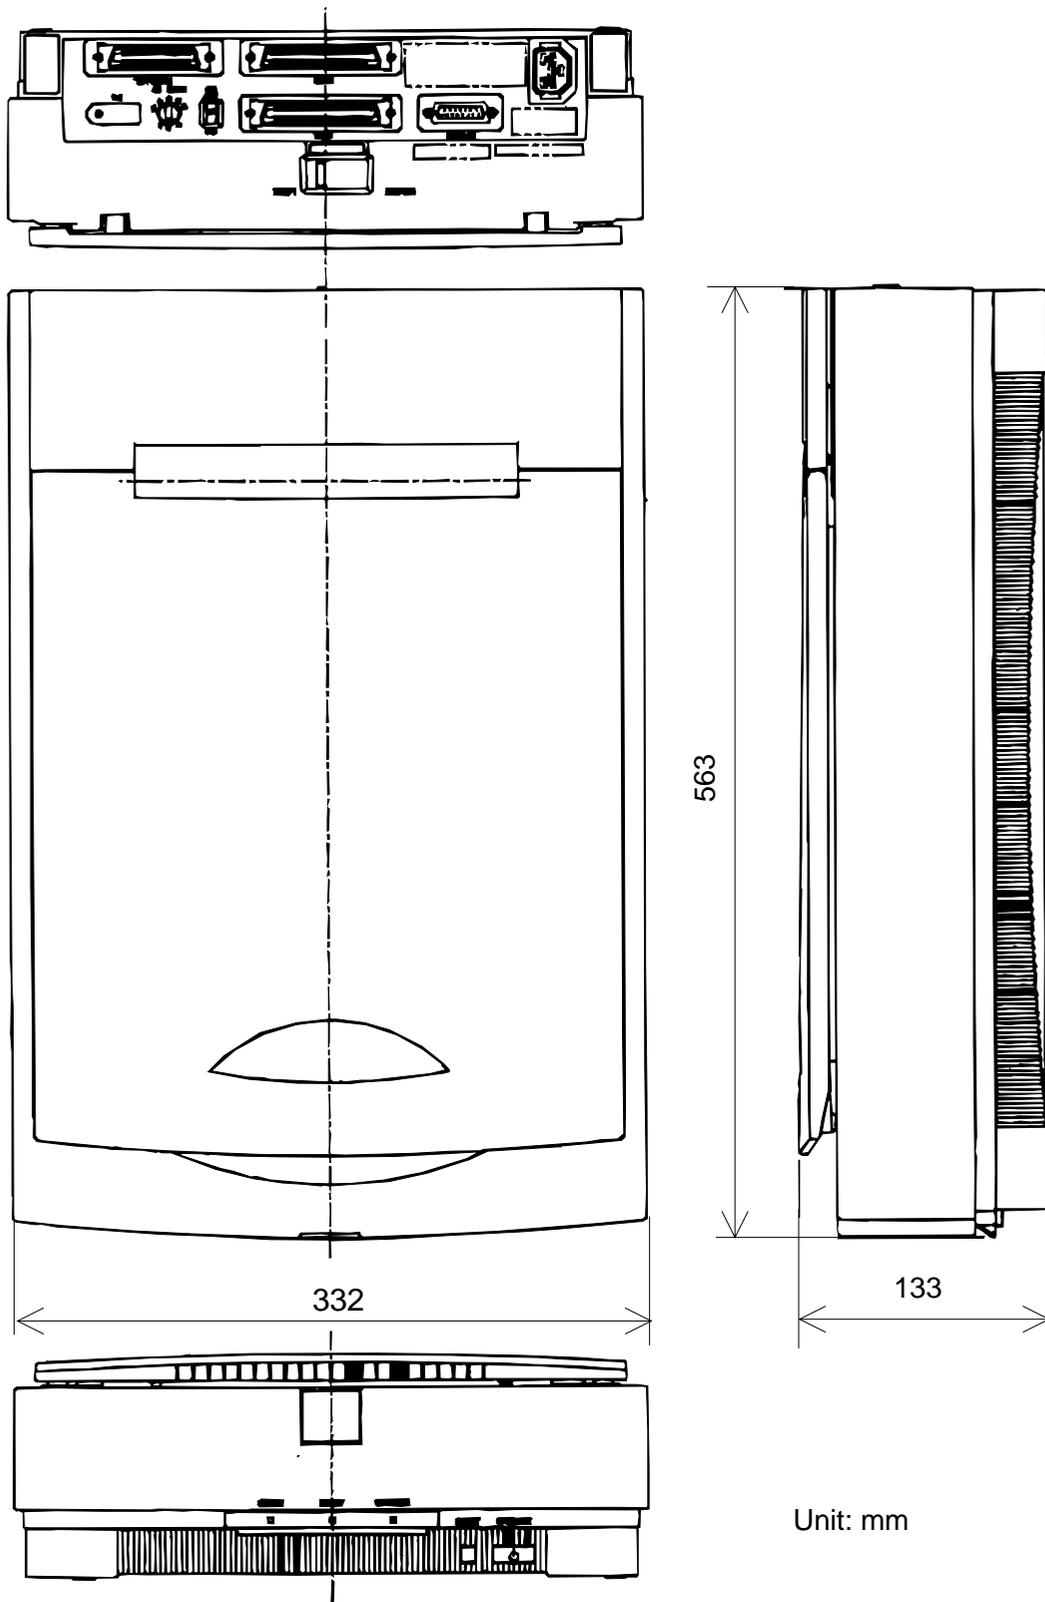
GT-9500/Expression 636 Case Outline Drawing
